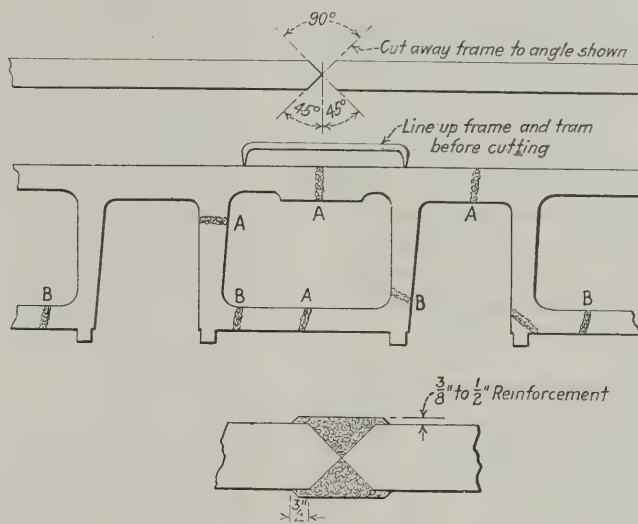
Location of Common Frame Breaks and Method of Welding with Gas
